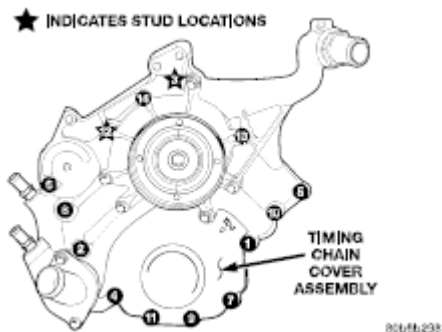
Identifying Removal & Installation Sequence Of Timing Cover Bolts
